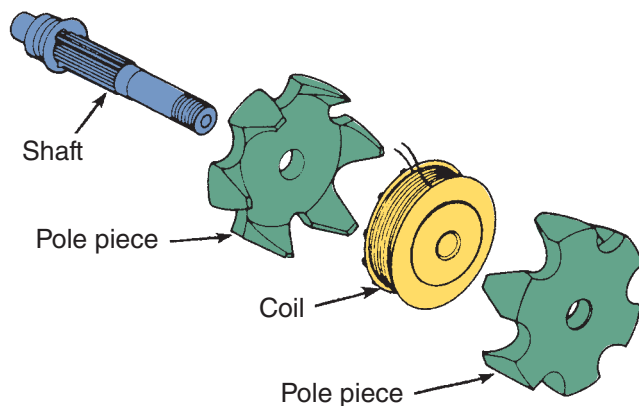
The rotor is made up of a coil, pole pieces, and a shaft.
